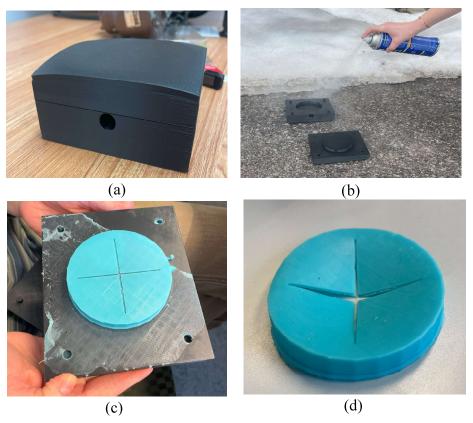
(a) 3D printed mold. (b) Spraying the release agent onto the inner face of the mold. (c) Casted silicone cover prior to removing it from mold. (d) finished cup cover.
